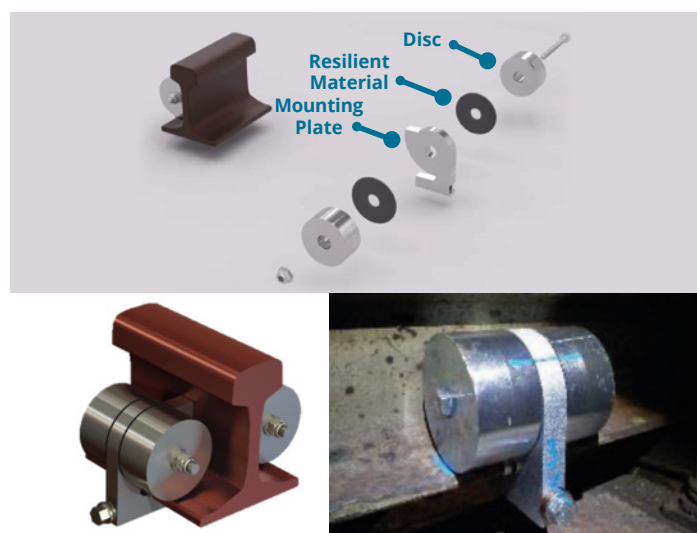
Design (top, lower left) and Prototype (lower right) of Rigid Contact Tuned Mass Damper (RCTMD).
